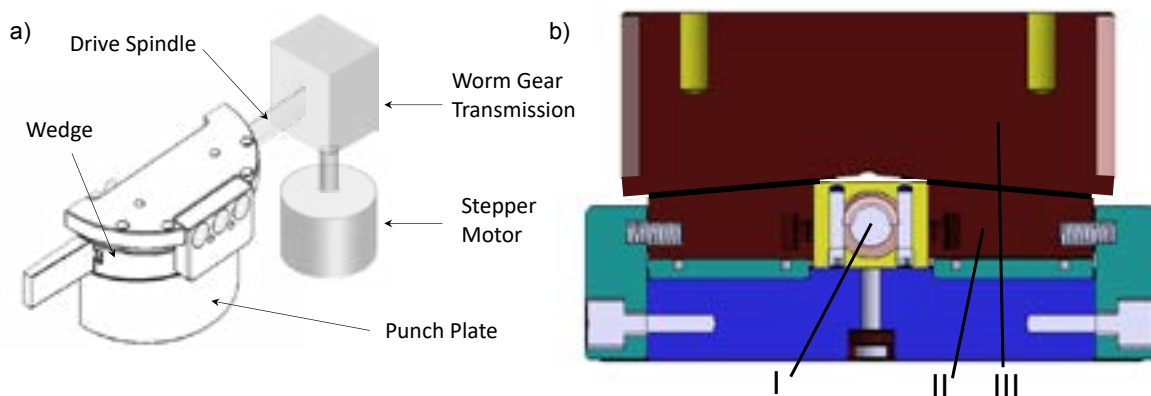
a) Wedge adjustment system consisting of several wedges connecting a stepper motor via a spindle with the punch, b) detailed assembly of the wedge adjustment system.
